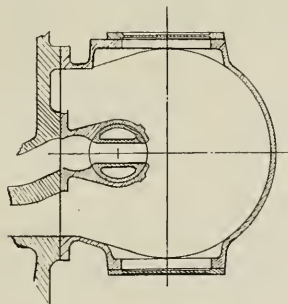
SULZER ROTARY SCAVENGE VALVE
